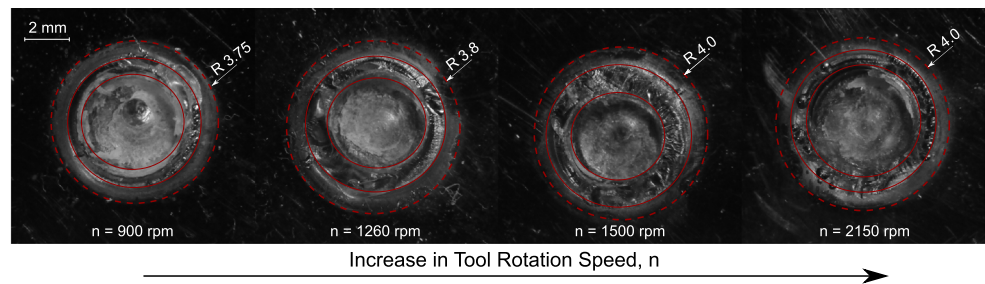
Macrograph of typical regions of weld produced by FSSW varying the tool rotation speed, n
